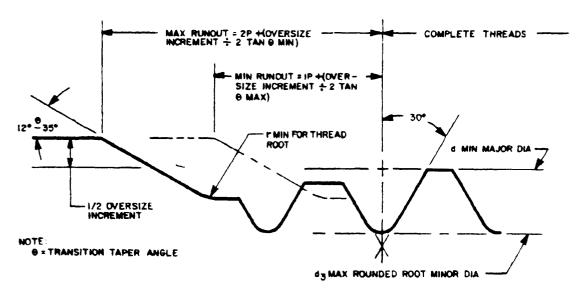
FULL SHANK FASTENER - OVERSIZE DIAMETER
